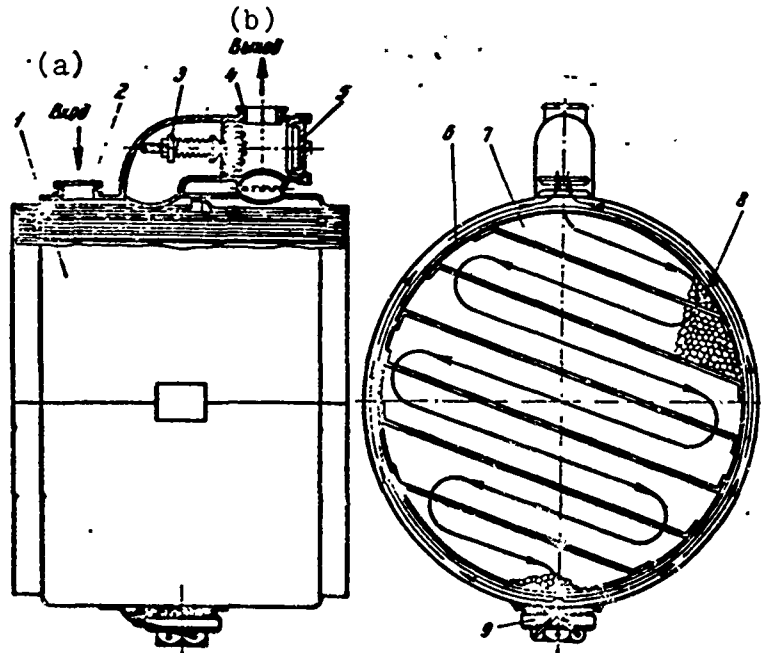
Air-oil cooler: 1 - external shell; 2 - intake pipe; 3 - reducing valve; 4 - exhaust duct; 5 - plug; 6 - inner shell; 7 - partitions directing the oil; 8 - cells; 9 - drain plug.
